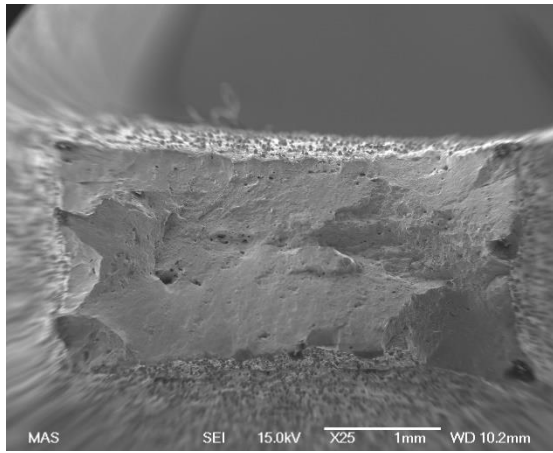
88 B3 As Built x25 Fracture Surface, UTS 615 MPa
